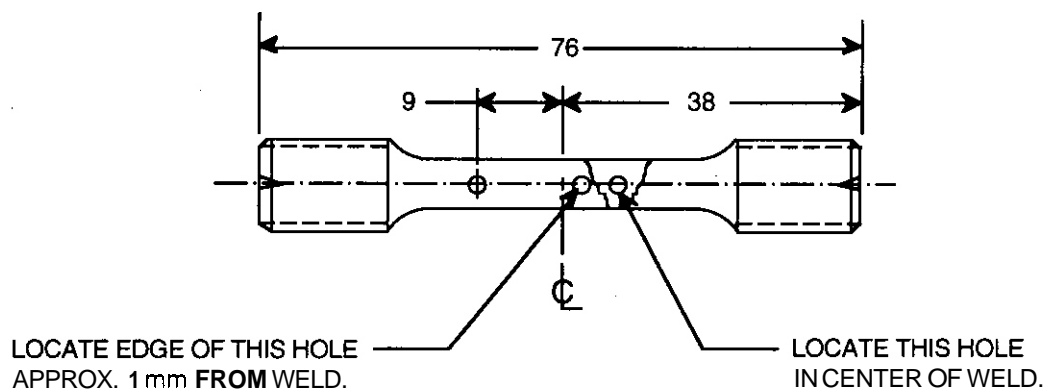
Weld specimen fabricated from gas-metal-arc welded plate of Type 316L SS with matching filler metal. Crevices were formed by inserting tight-fitting SS pins into the holes.
